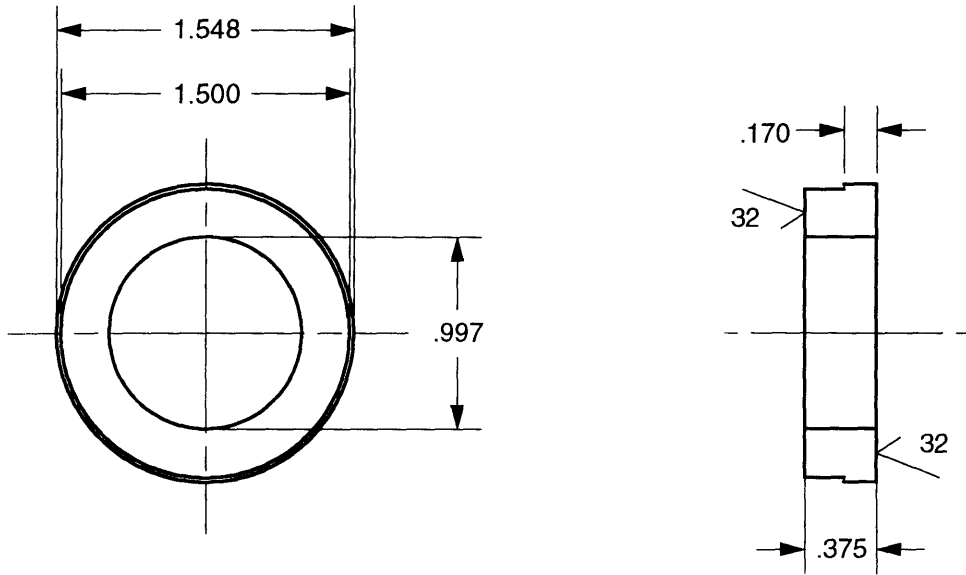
Extruder Head/Gear Pump Inlet Flange Adapter Disk.
